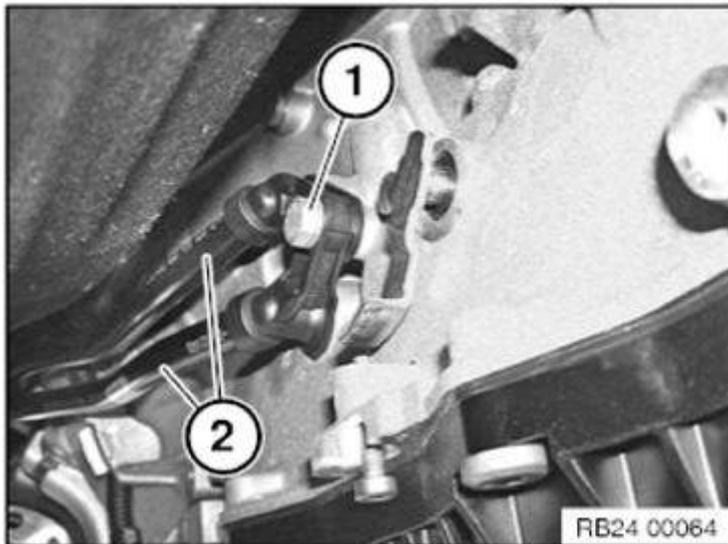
Identifying Hydraulic Lines To Transmission Oil Cooler And Screw
